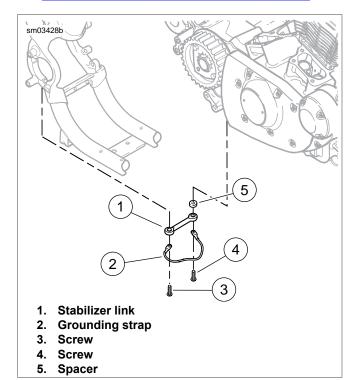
Rear Stabilizer Link Assembly (typical)
